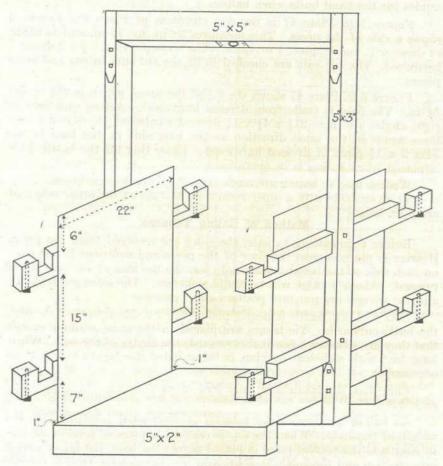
DRAWING OF PRESS WITHOUT SIDES OR LID. (Not to seale.)
